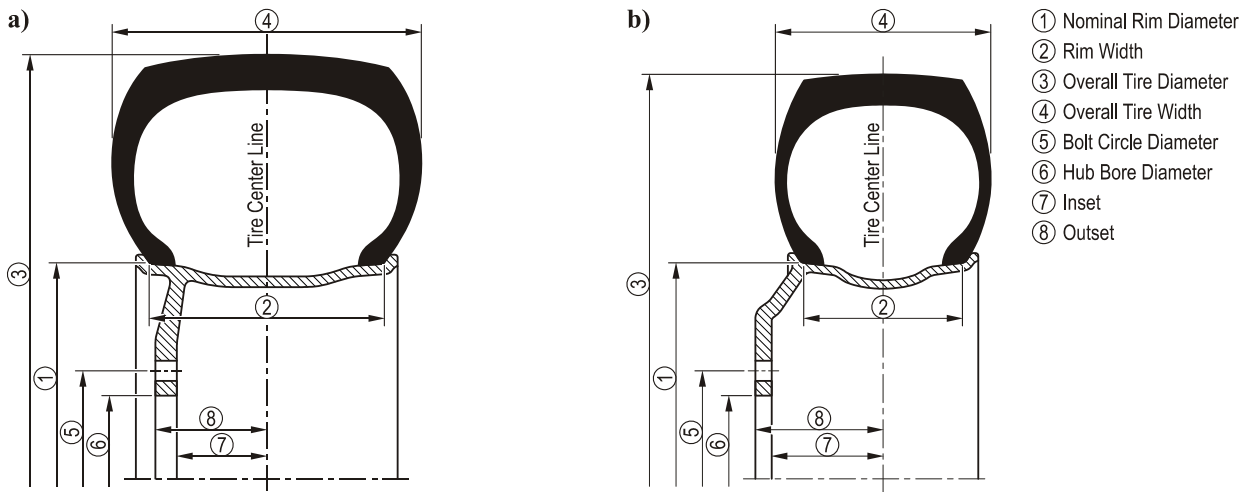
Cross-sections of the crane wheel and tire: a) front wheel, b) rear wheel. Dimensions are provided in Table 4.19 through Table 4.22
